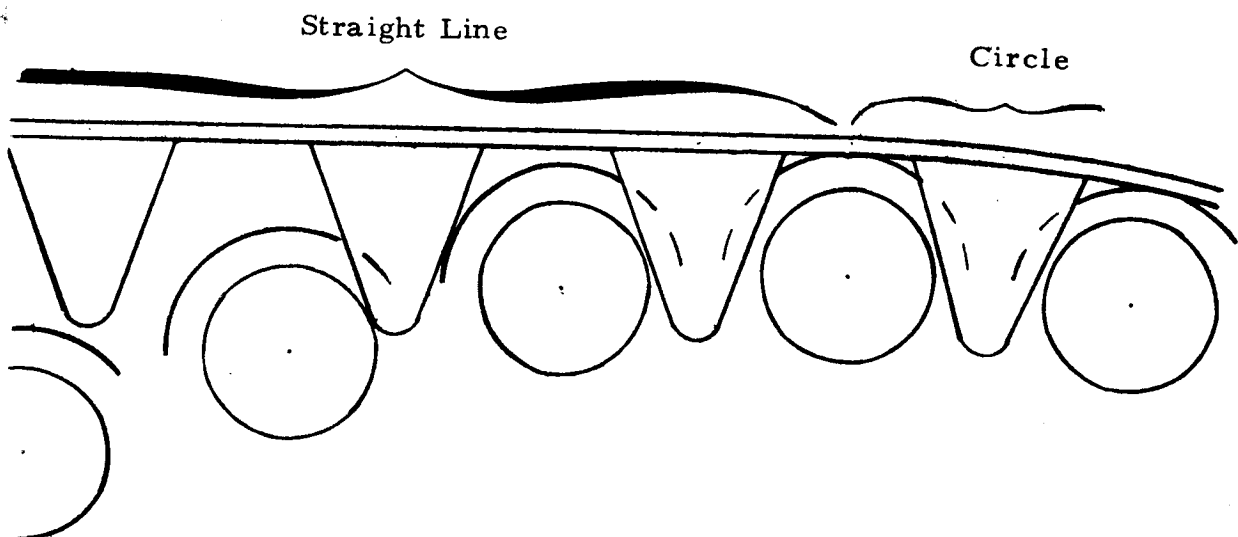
Worst Case for Drive Lug Engagement: Loop Approaches Drive Drum in Straight Line which Defines Minimum Cone Angle of Drive Lugs for Safe Clearance. Calculation is given in Appendix I.
